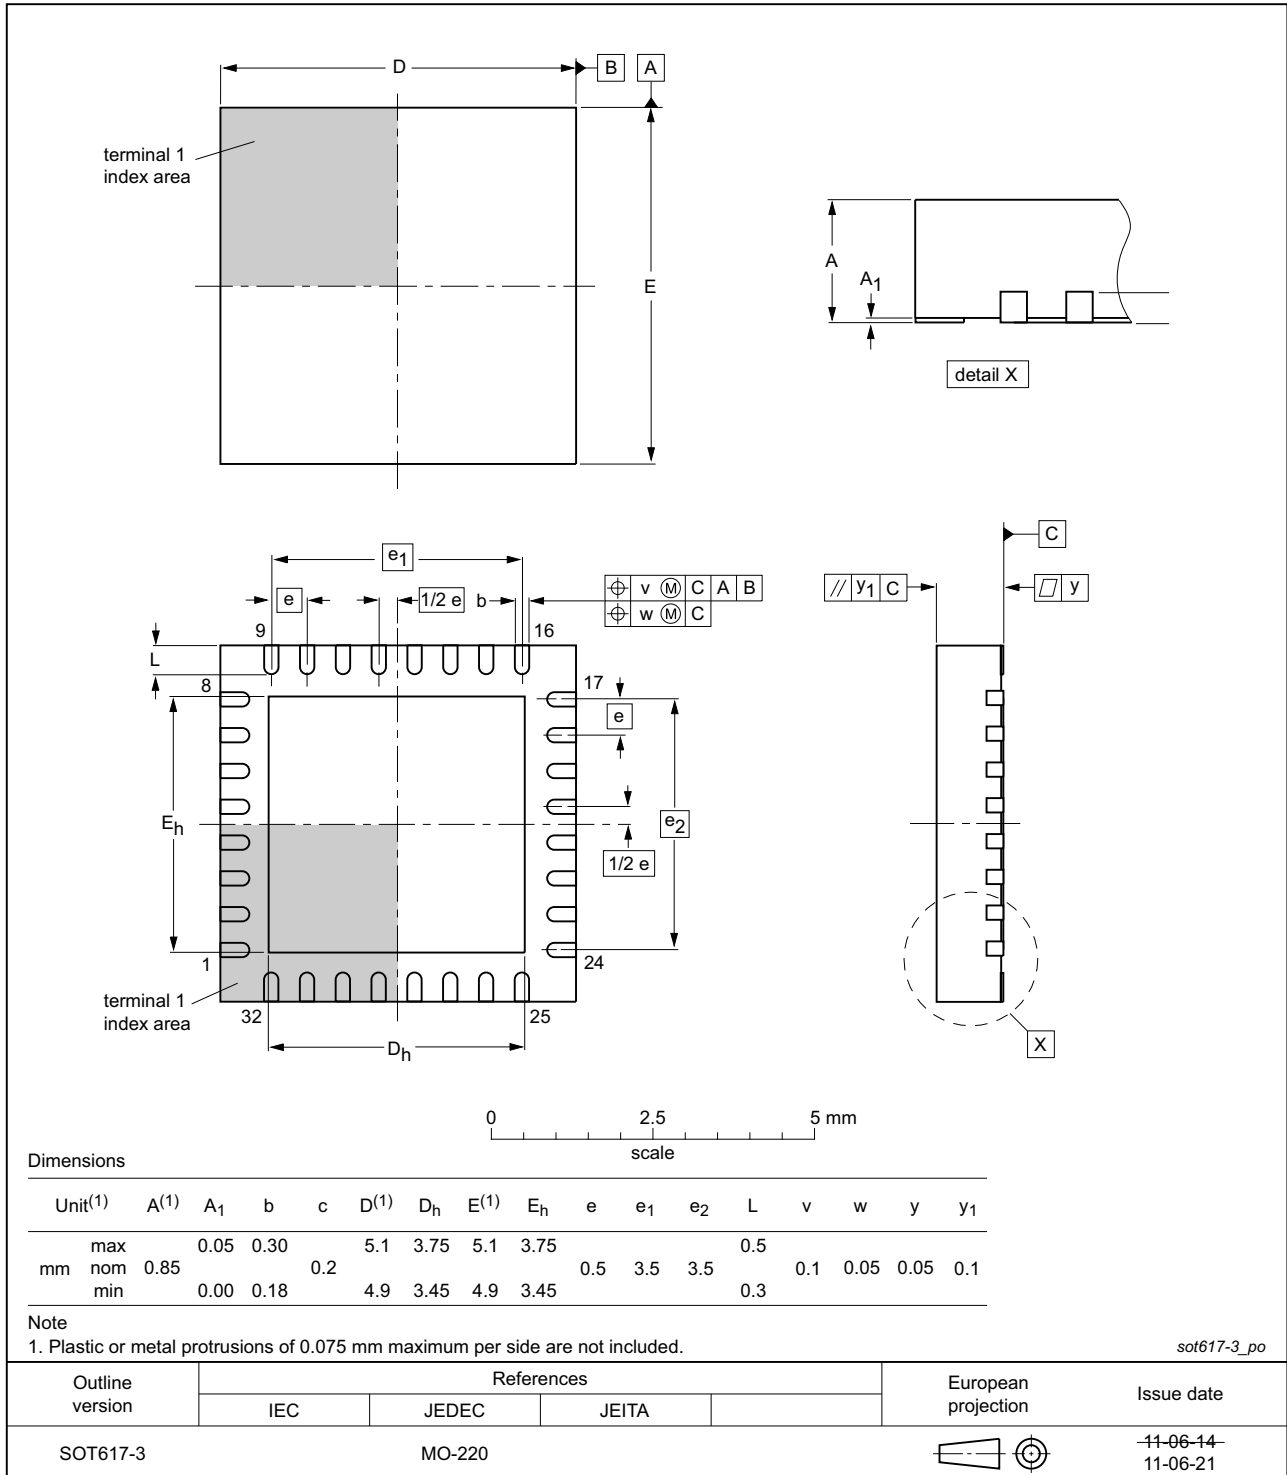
Package outline SOT617-3 (HVQFN32) of PCA8561
